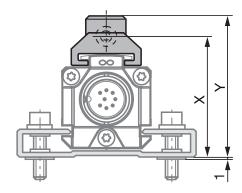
Dimensions and distances with BTL5-M/N-2814-1S magnet
